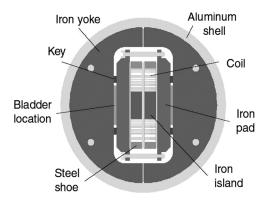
Principal components of a magnet with racetrack coils supported by a shell-type structure.
